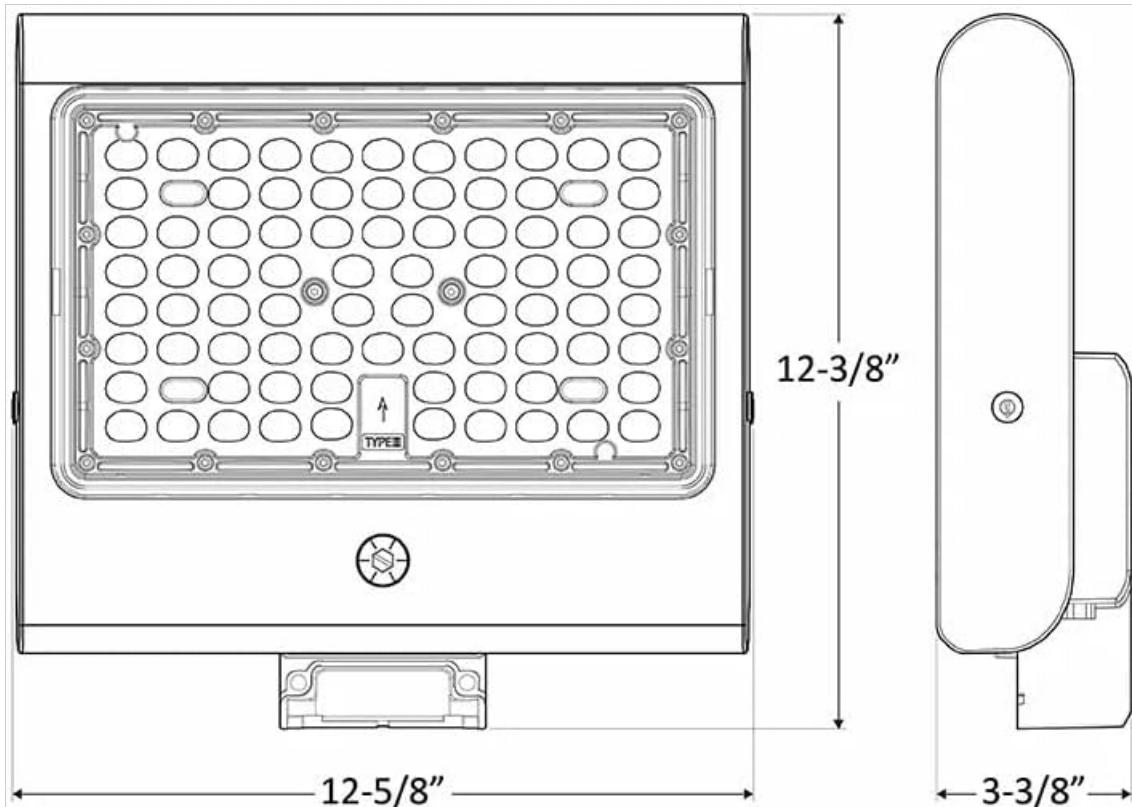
Dimensional drawing showing the fixture's length (12-5/8"), height (12-3/8"), and depth (3-3/8").
